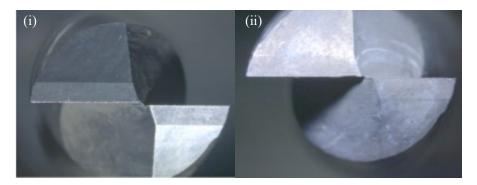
Cutting tool images (i) Before coating (ii) After coating
